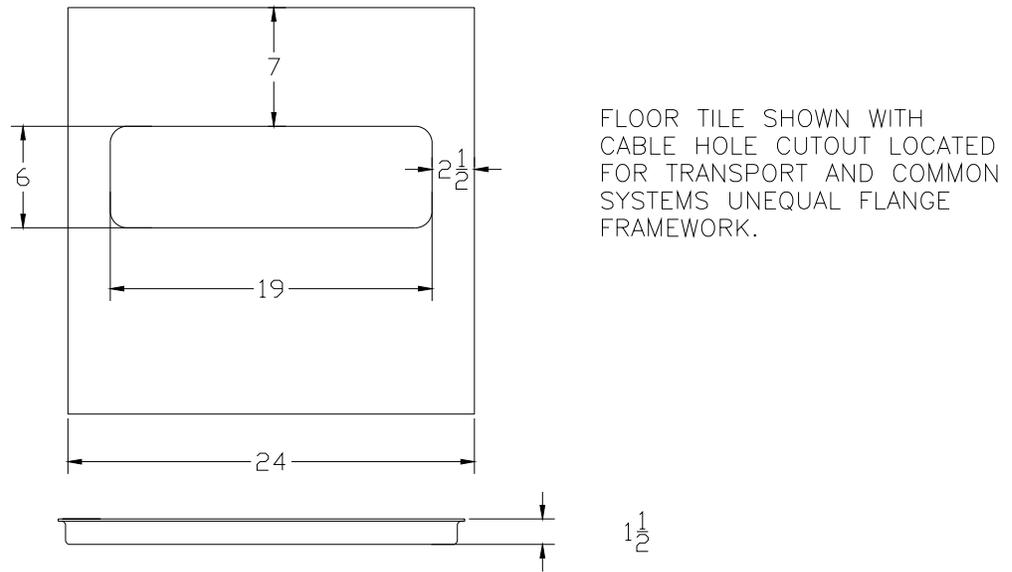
Floor Tile Cable Cutout – Equipment Frames
